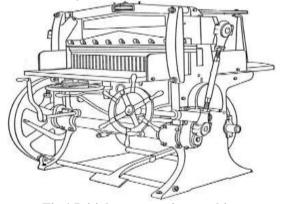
Initial paper cutting machine Extising paper cutting machine Manual paper cutters:
